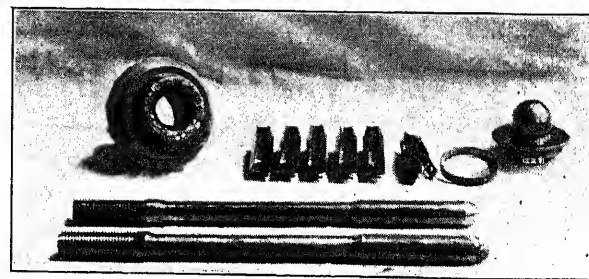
ARCING BELL COMPARISON OF NEW AND USED CONTACT ROD, AND EXPLODED VIEW OF CONTACT SEGMENTS TAKEN FROM ONE POLE OF 136B BREAKER AFTER TESTS 36 TO 65
